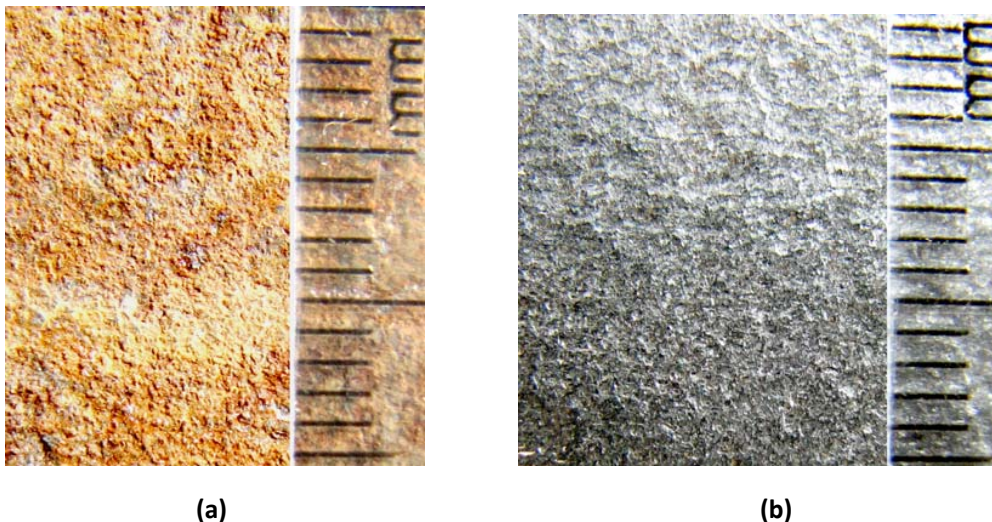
(a) Photograph depicting the extent of corrosion/pitting on the as-received surface of piping, and (b) cleanliness of the bristle blasted surface after corrosion removal.
